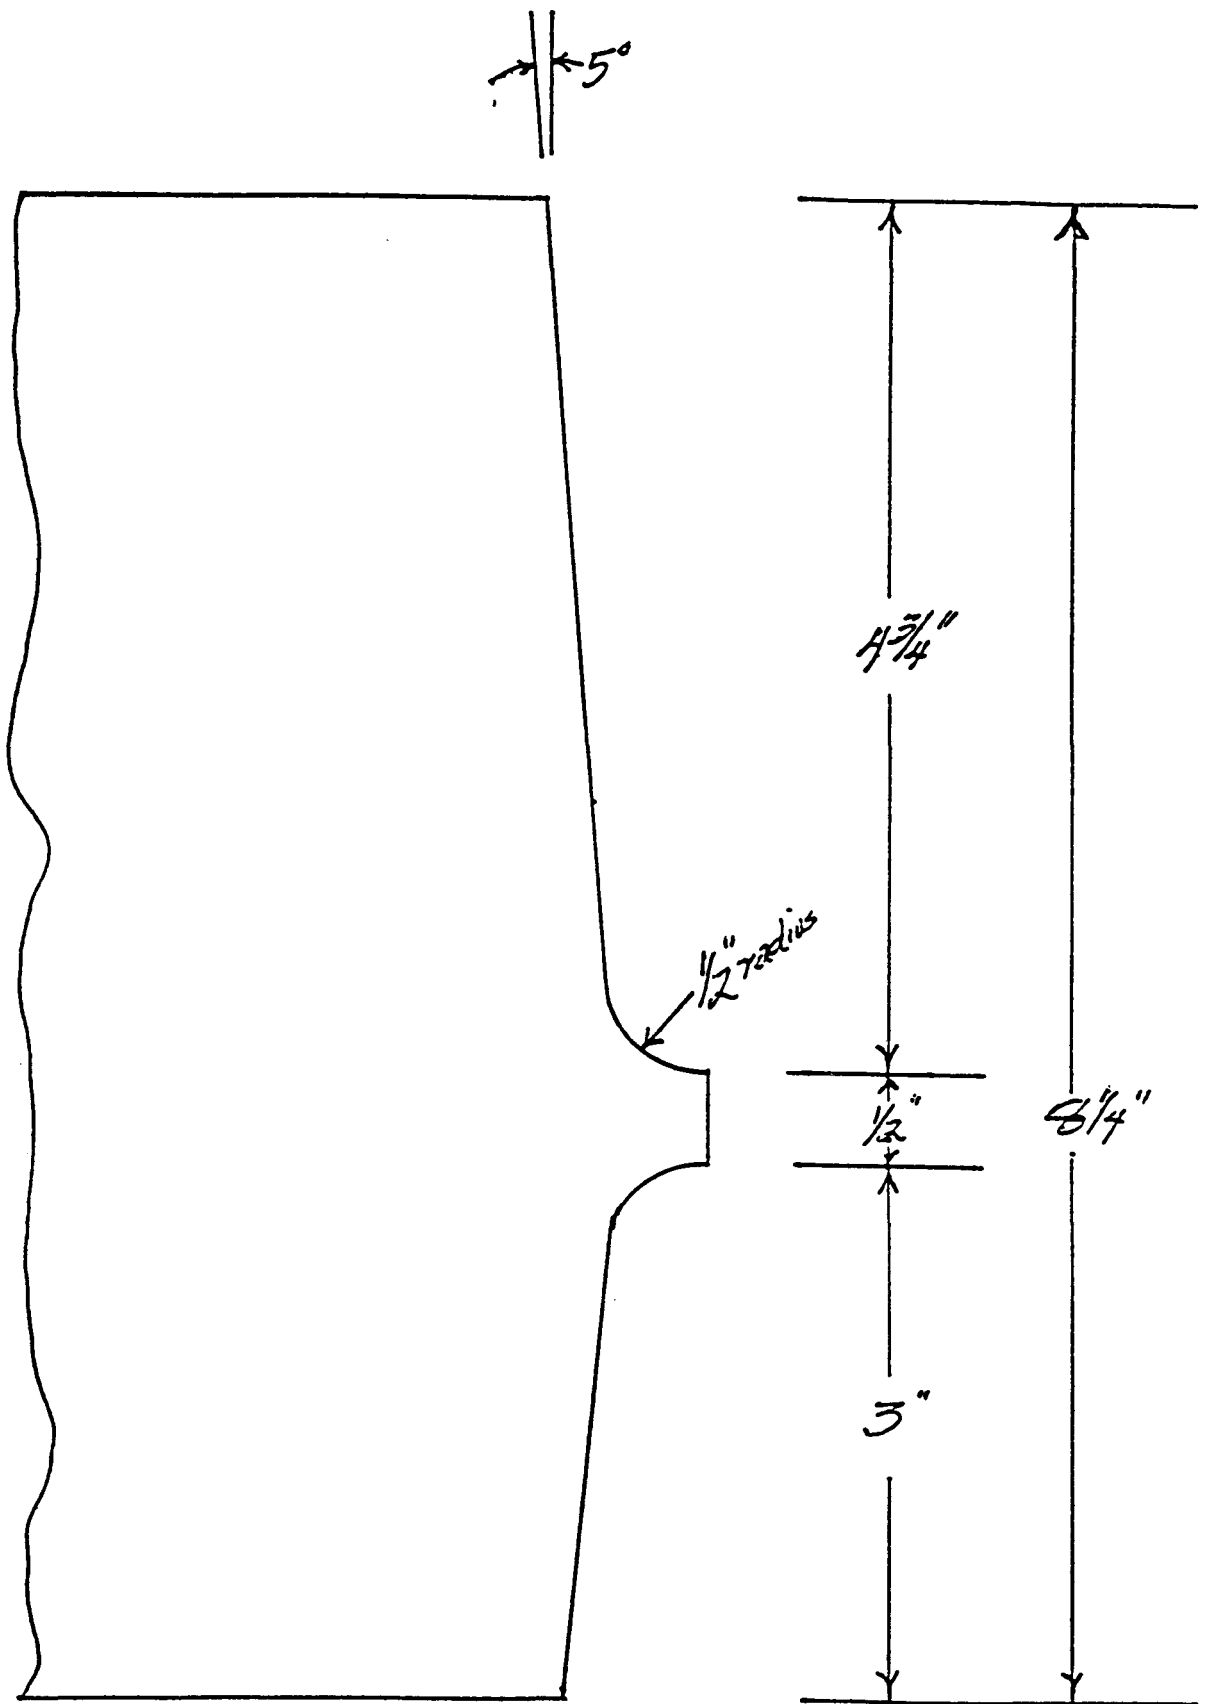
Weld joint design for Welds W8A and W9A
